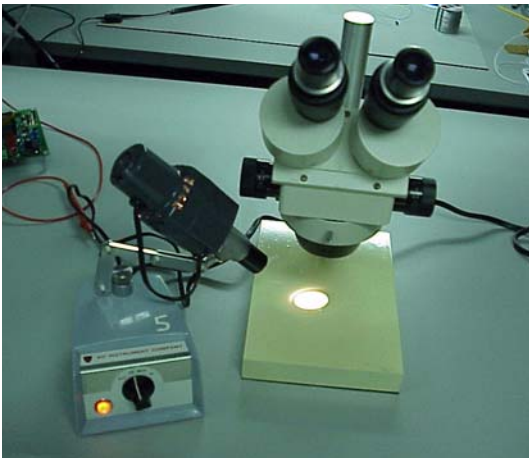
Optional equipment includes a PCB vise and an inspection microscope 7-40X
